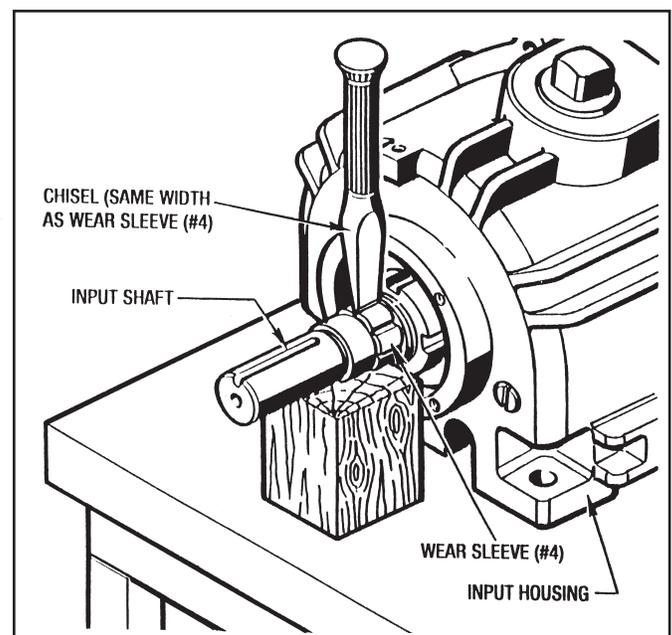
Wear Sleeve Removal (#11 Posidyne Only)
